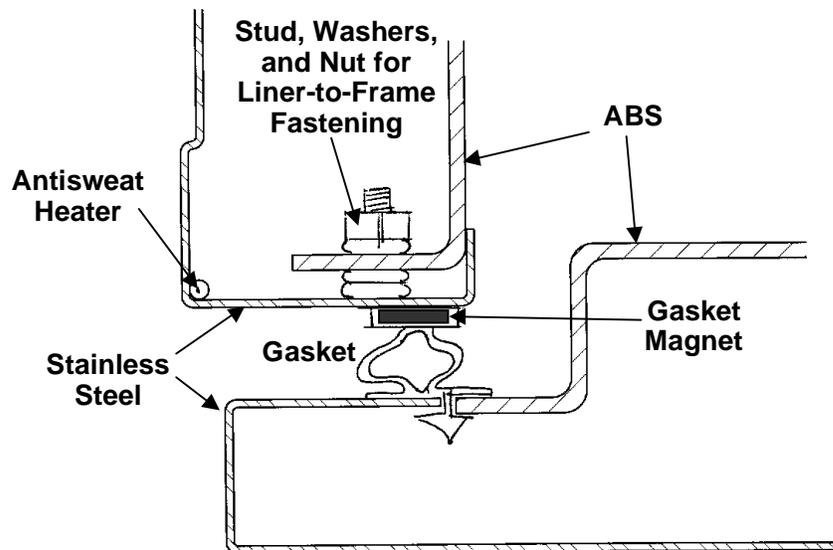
Baseline Refrigerator Face Frame Cross Section
